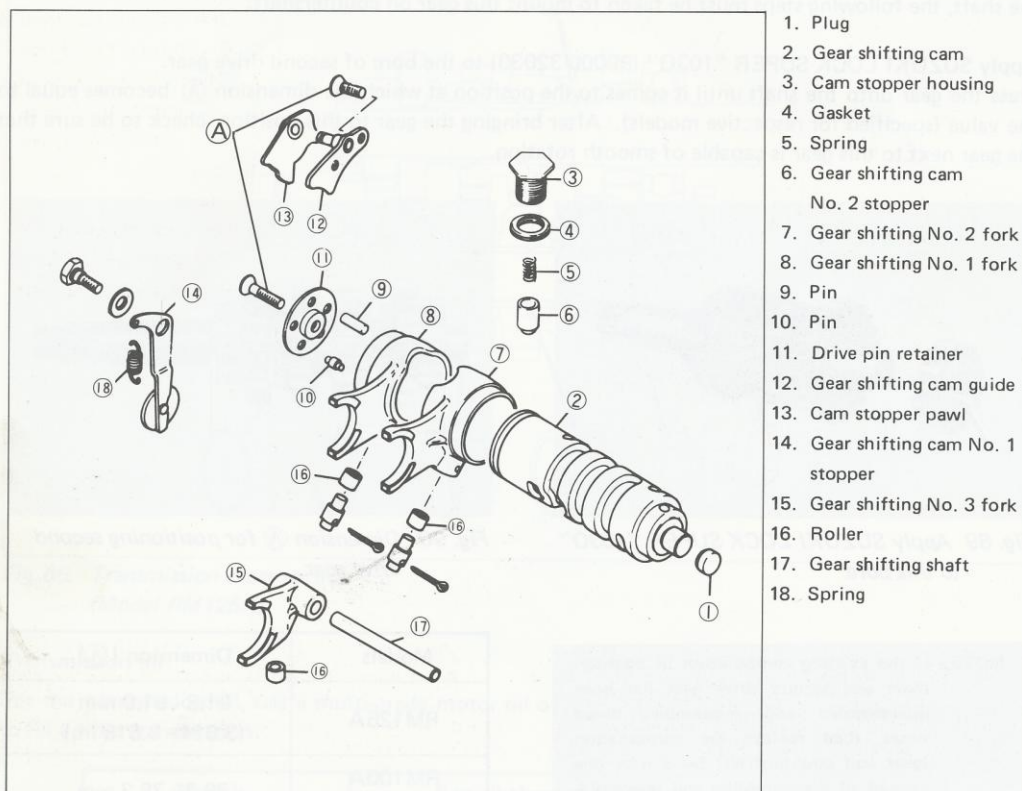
Exploded view of shifting mechanism (Models RM100A, RM125M and RM125S)
